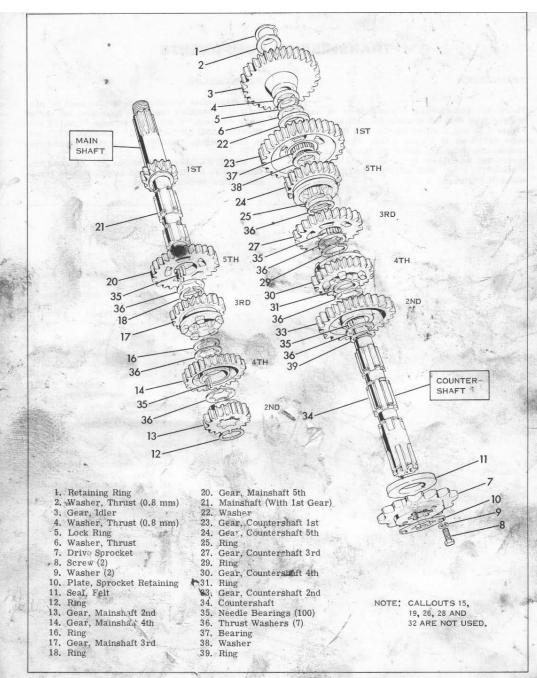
A. Exploded View of Later Transmission (SX-250, Roller Bearing Type)
